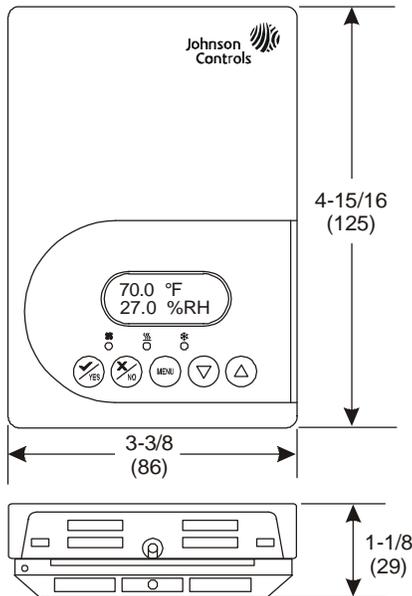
T62xx Thermostat Controller Dimensions, in. (mm)
